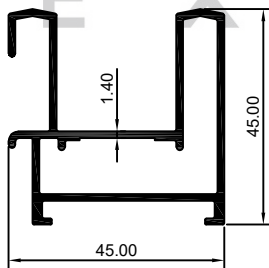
DETAILS OF EURO SERIES - 27.00 MM SLIDING WINDOW ASSEMBLY
